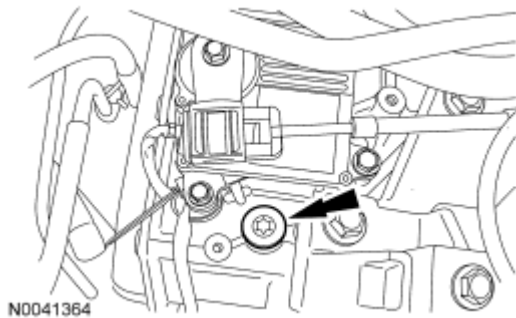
Locating Transmission Fluid Drain Plug
